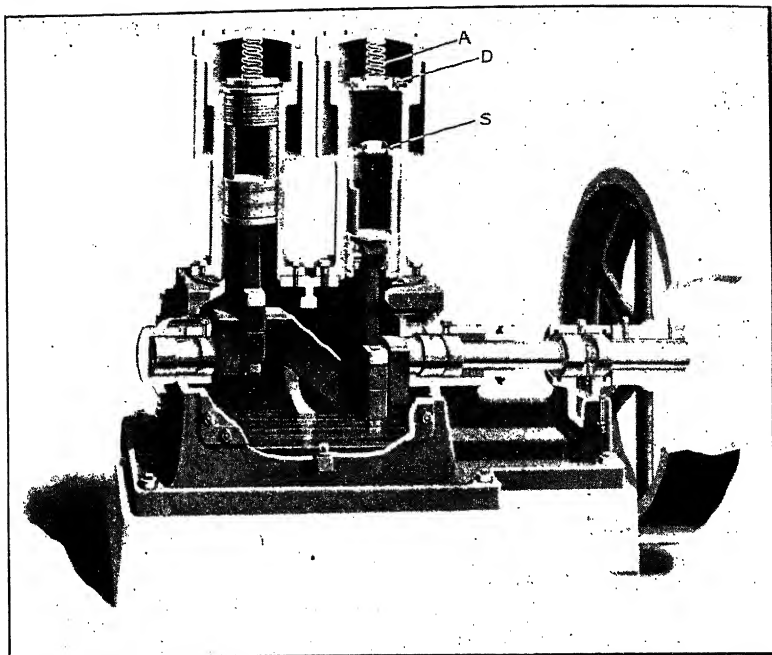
Cross-section of vertical compressor with single ring-plate valves (Figs. 67 and 68).
